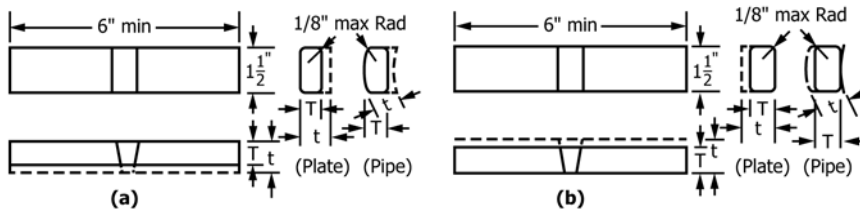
Transverse Face- and Root-Bend Specimens, for Pipe and Plate
